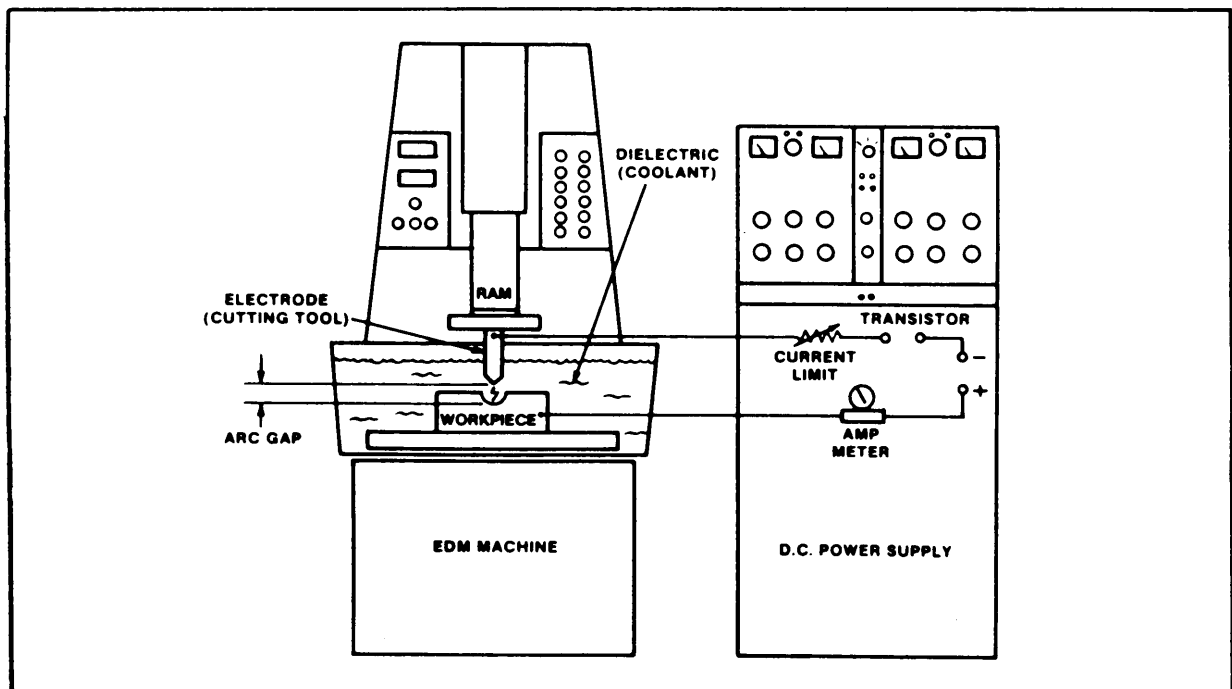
Electrical Discharge Machining (Elox Division/Colt Industries)
